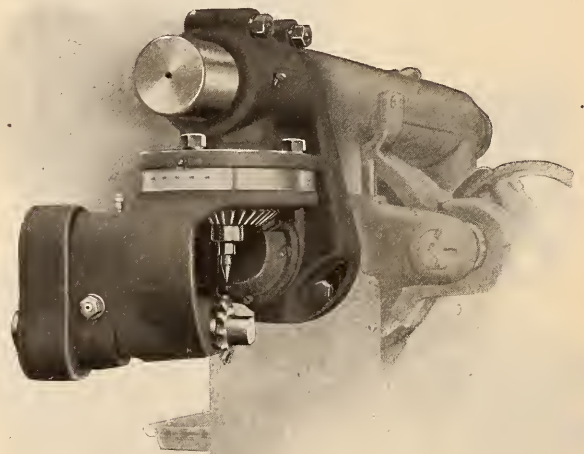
UNIVERSAL HEAD FOR SPIRALS.
